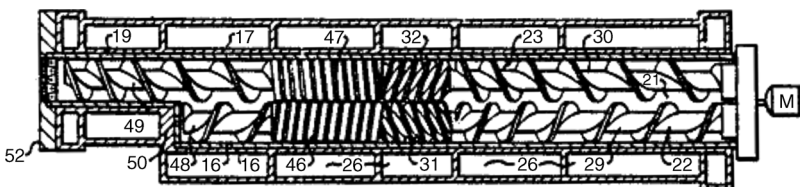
Fuller Welding Engineering modular tangential counter-rotating twin-screw extruder [71].
